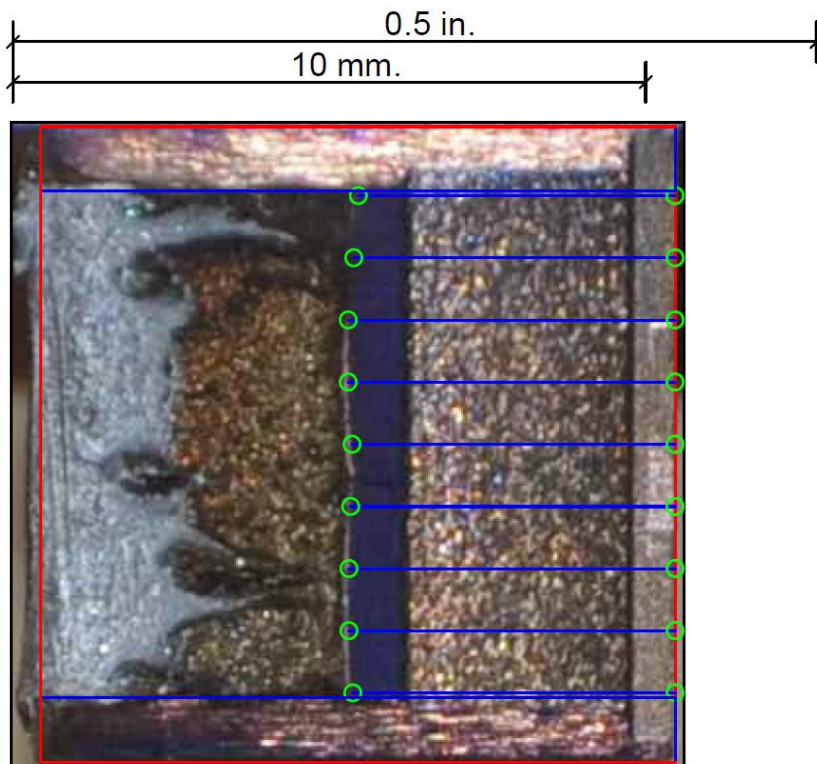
Specimen H17' Fracture Surface
